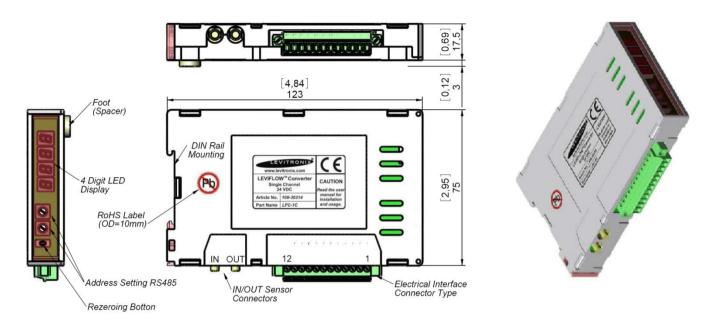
Dimensions and layout of interfaces of single channel converter LFC-1C / LFC-1C-F4
